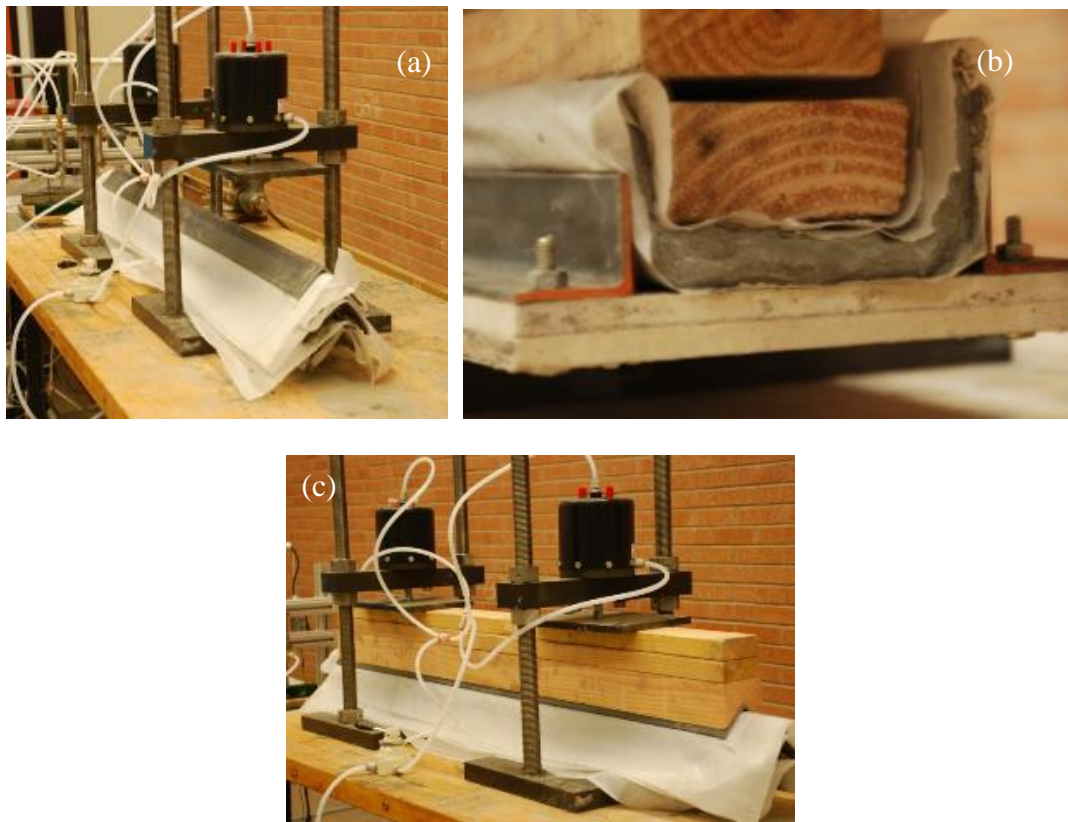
(a) casting of angle shapes using steel angles as molds; (b) casting of channel sections with wooden buffer boards and steel angles; (c) pressing station being used for forming angles
